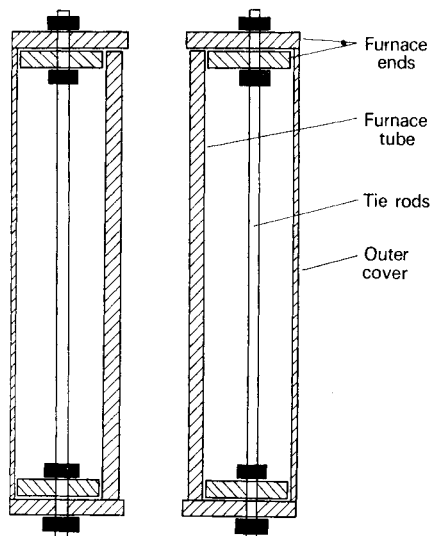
Assembling the furnace. The lower furnace end should be placed in position. The tube and outer cover may also be positioned and the insulation poured until level with the top furnace end. Care must be taken to keep the tube upright.
